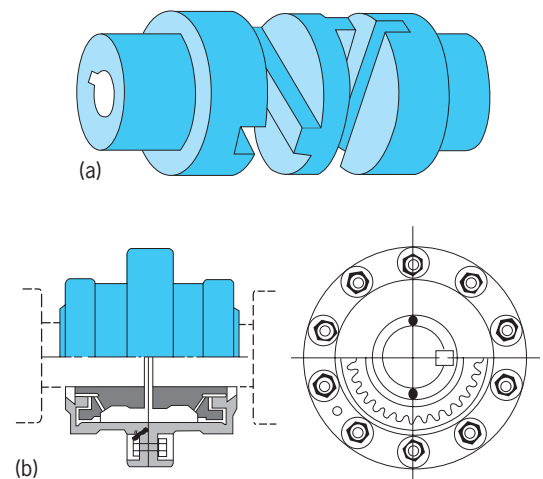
Flexible coupling. (a) Oldham (double-slider) coupling. (b) Geared "fast" flexible coupling. (After E. A. Avallone and T. Baumeister III, eds., *Marks' Standard Handbook for Mechanical Engineers*, 9th ed., McGraw-Hill, 1987)
